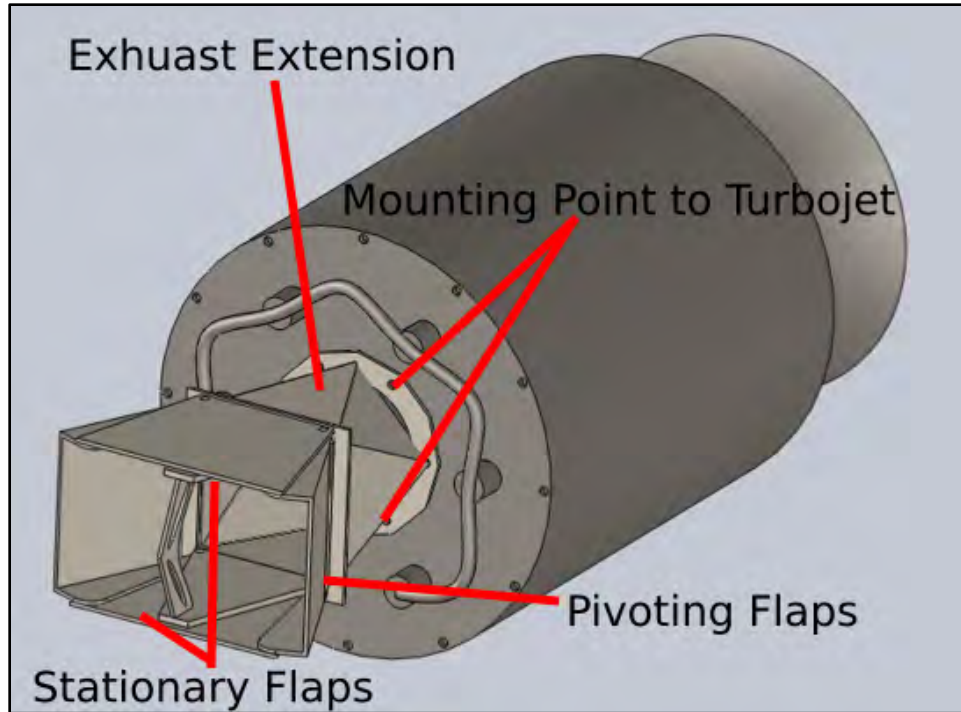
Assembly of the SR-30 Engine and nozzle.
